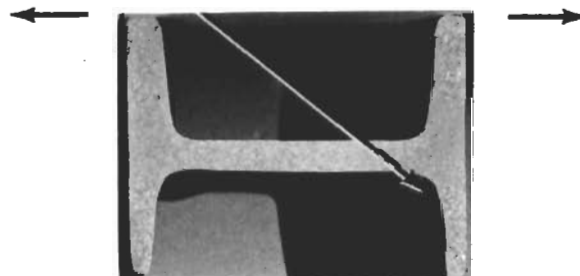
Severe Crack in Web Surface of Inconel 718 Fin Rib Forging Produced with the Mechanical Press. Arrows in Small Section Illustrate Typical Location and Depth Only. Crack in this Instance was Approximately 0.200 Inch Deep. External Arrows Indicate Directions of Metal Flow at Die Parting Line. Also See Figures 64, 65, and 66.
